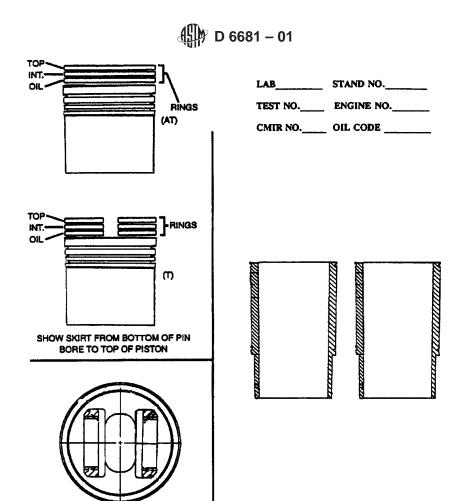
Example of Piston, Rings and Liner Photograph Layout
